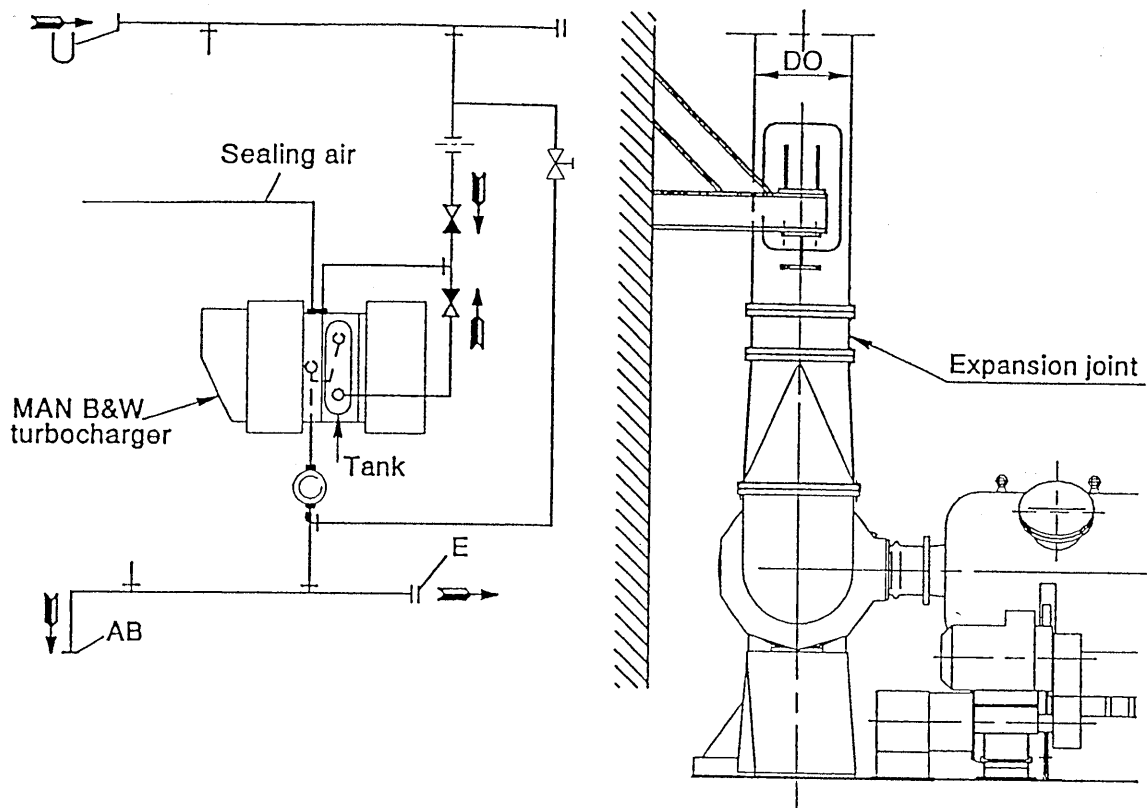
D Turbocharger Lubricating Oil Pipes
